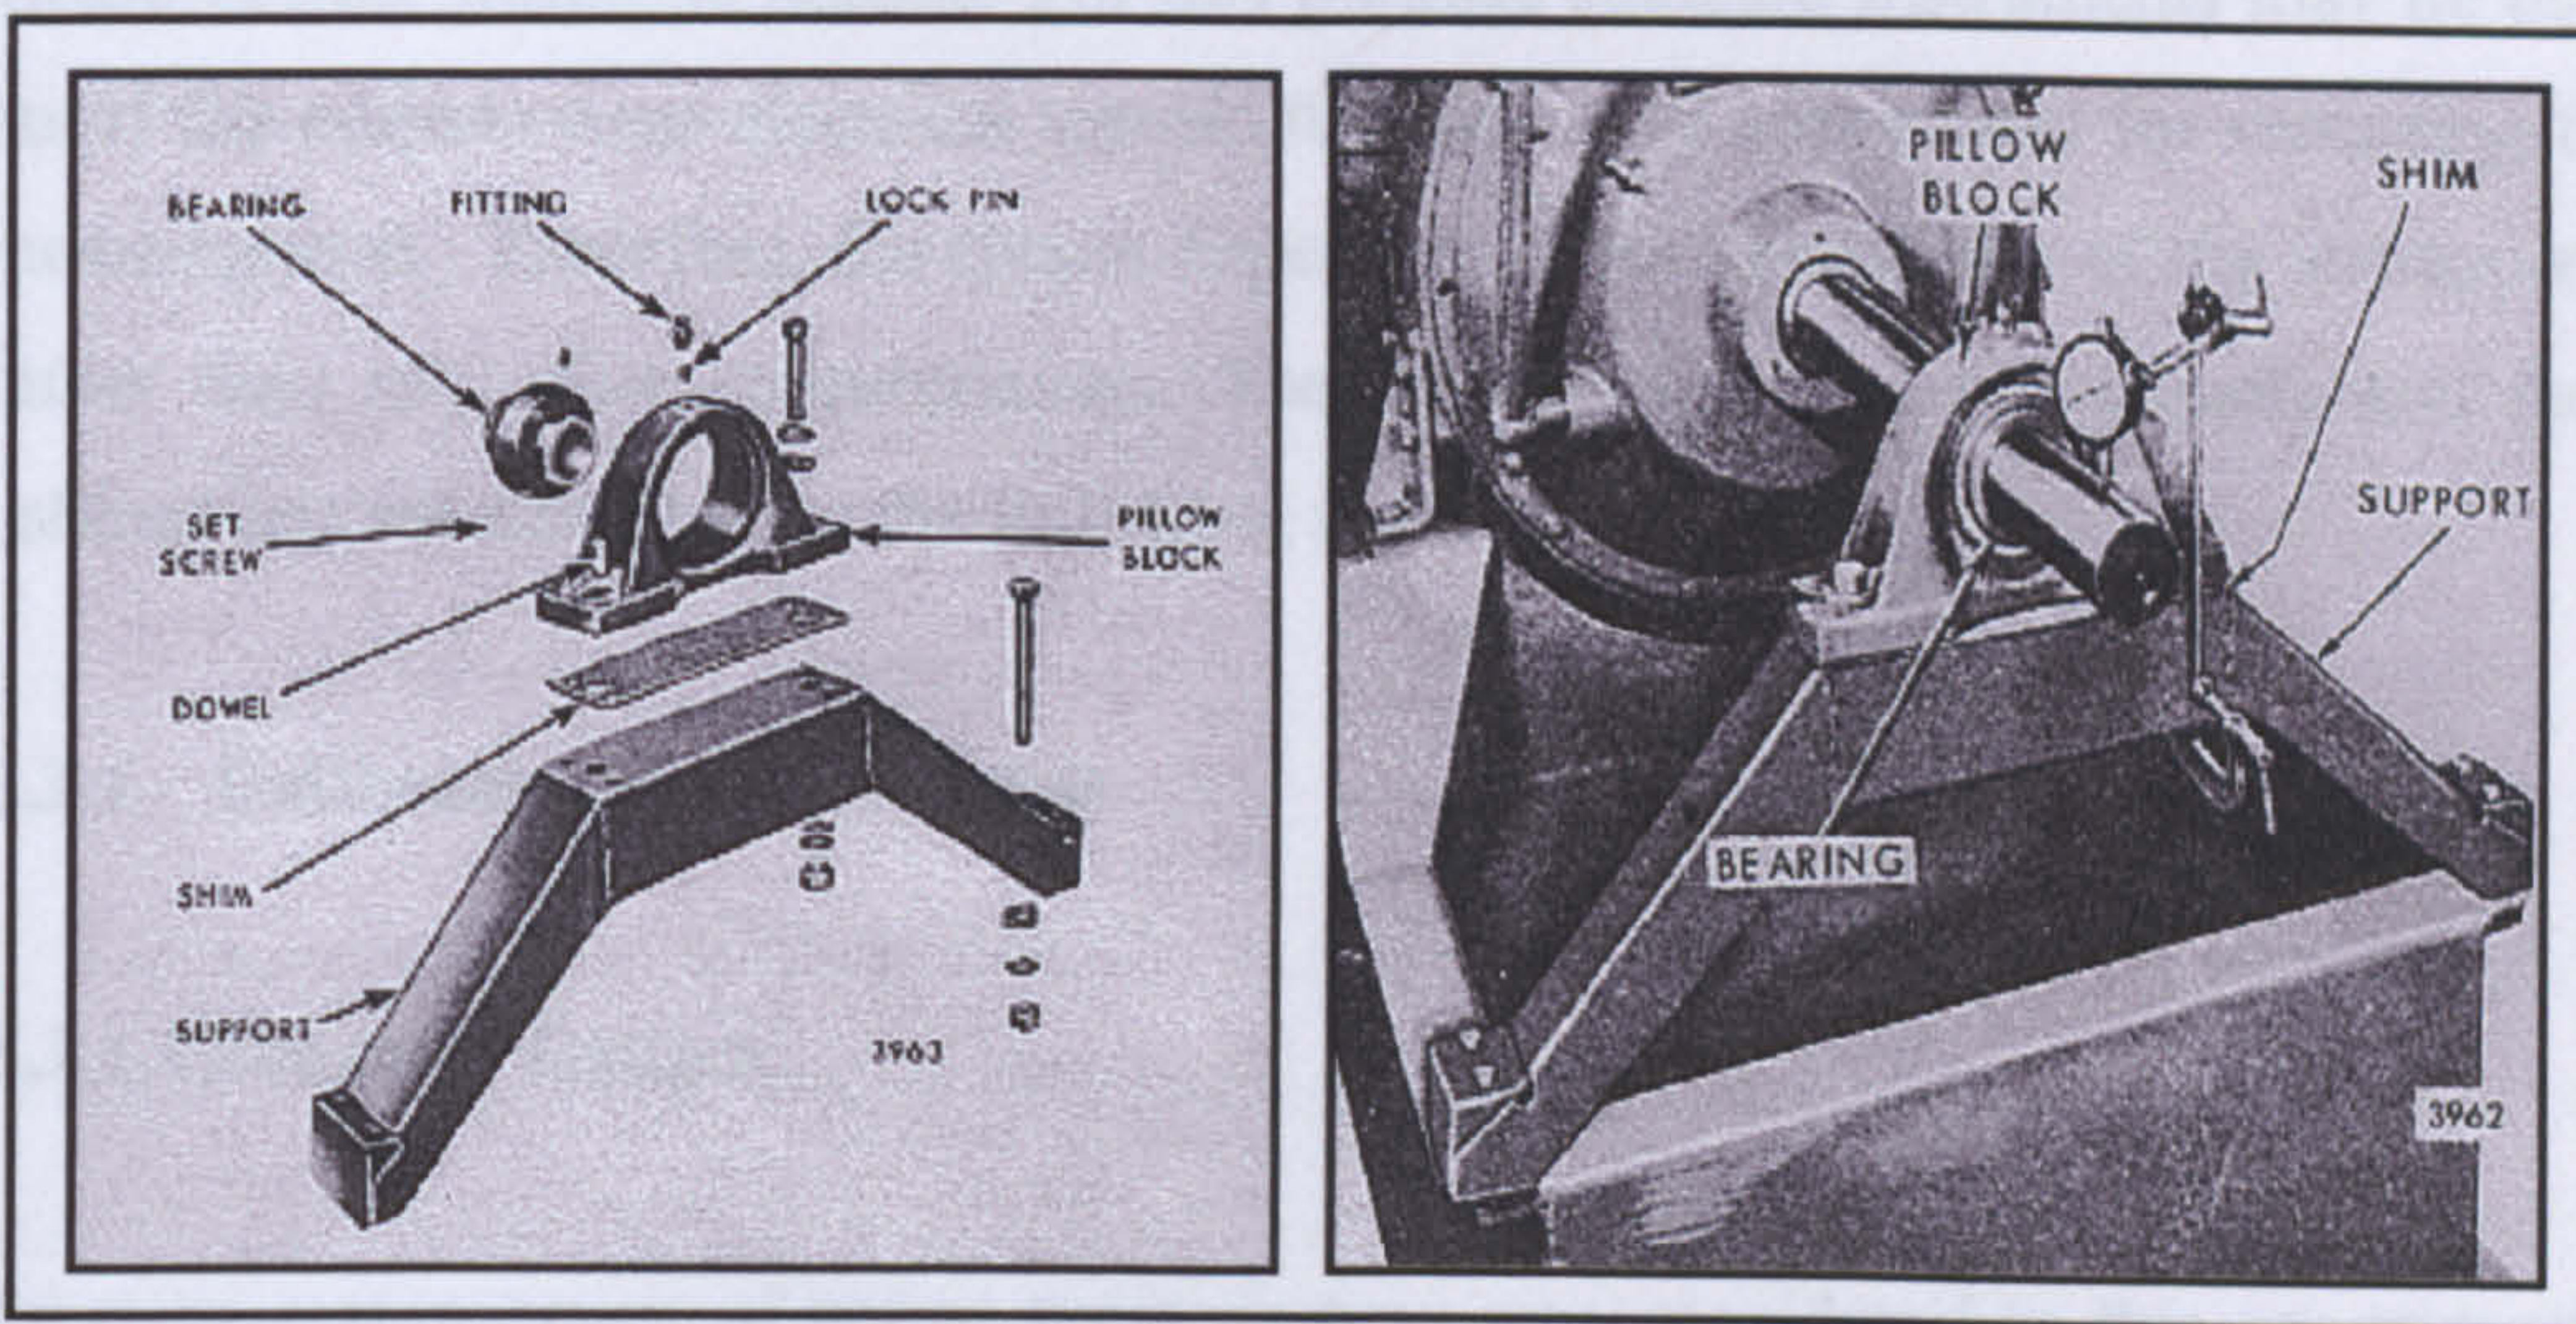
Complete structure of support and bearing housing for the electrical alternator
